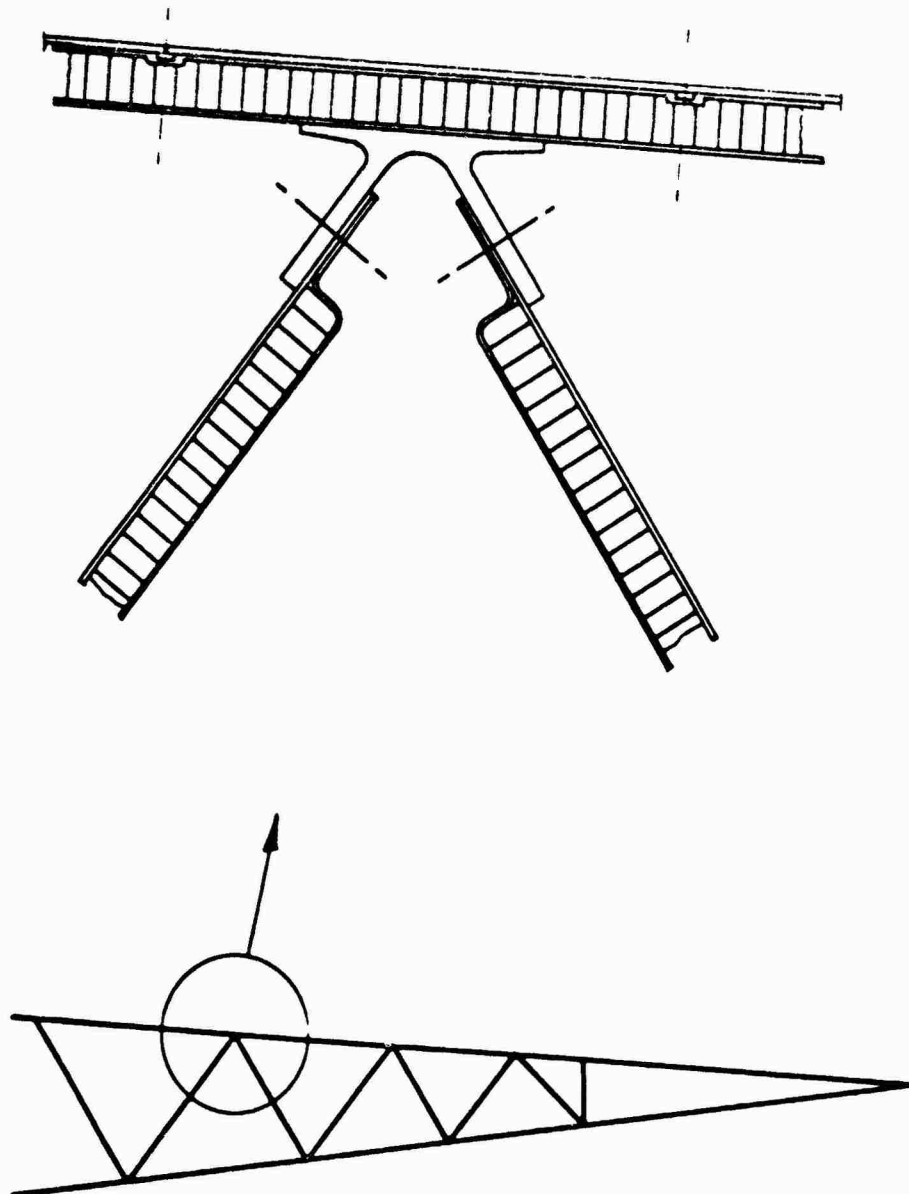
CONTINUOUS TRUSS TYPE TRAILING EDGE
